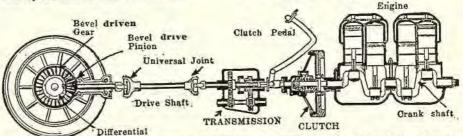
The modern method for driving the rear axle is by means of a propeller type of drive shaft with a bevel drive pinion and bevel-driven gear on the differential on the rear axle. Commercial cars with shaft drive instead of double-chain drive often use the worm drive.
